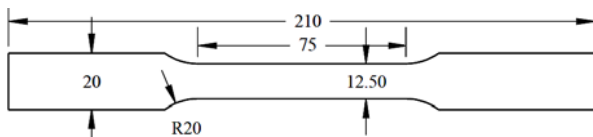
Tensile test dimensions cut according to ASTM-E8 standard
